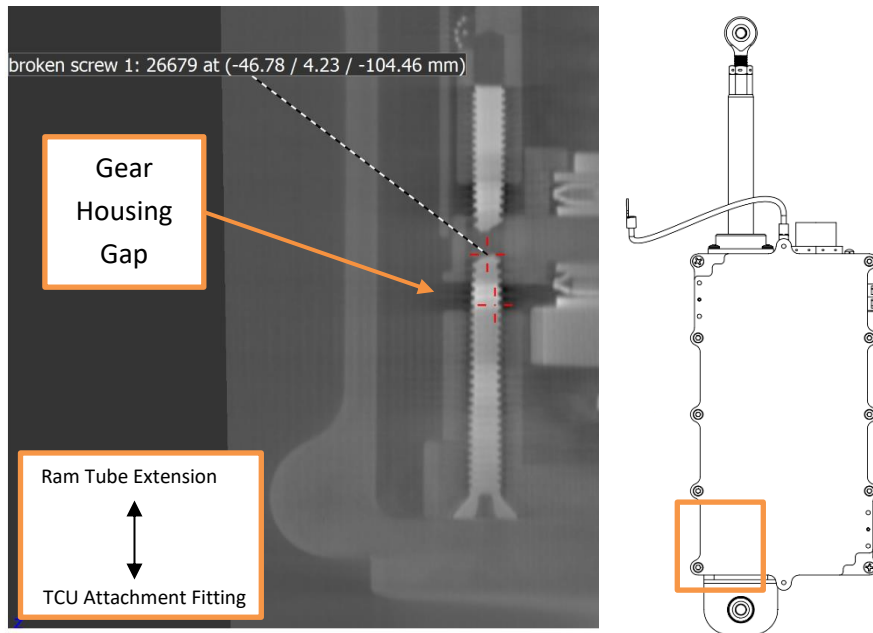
LH TCU actuator as-found condition showing broken screws (view from bottom)
